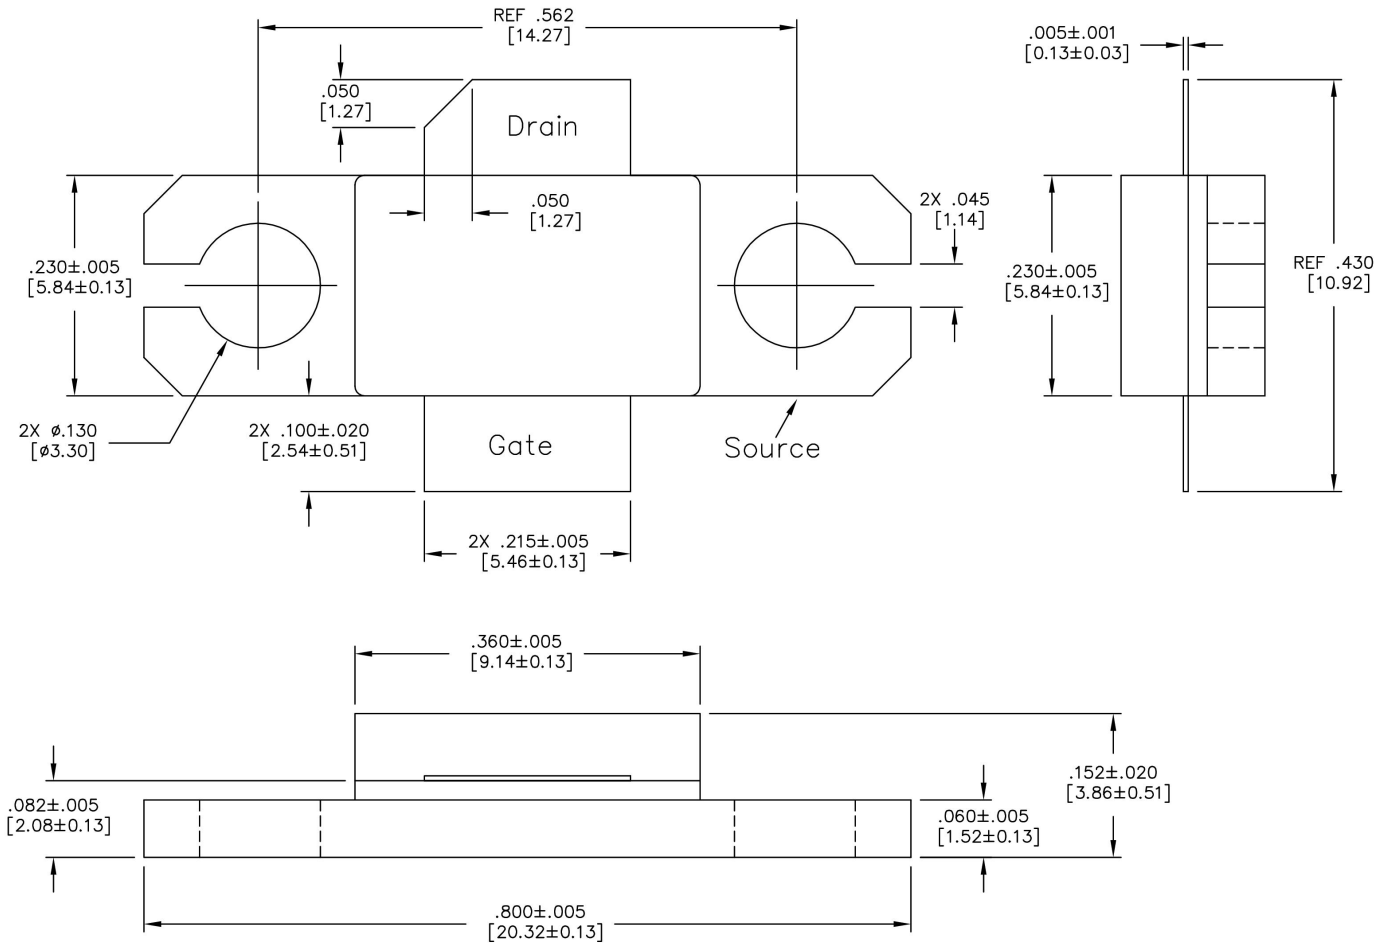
AC360B-2 Metal-Ceramic Package Dimensions (all dimensions in inches [millimeters])
